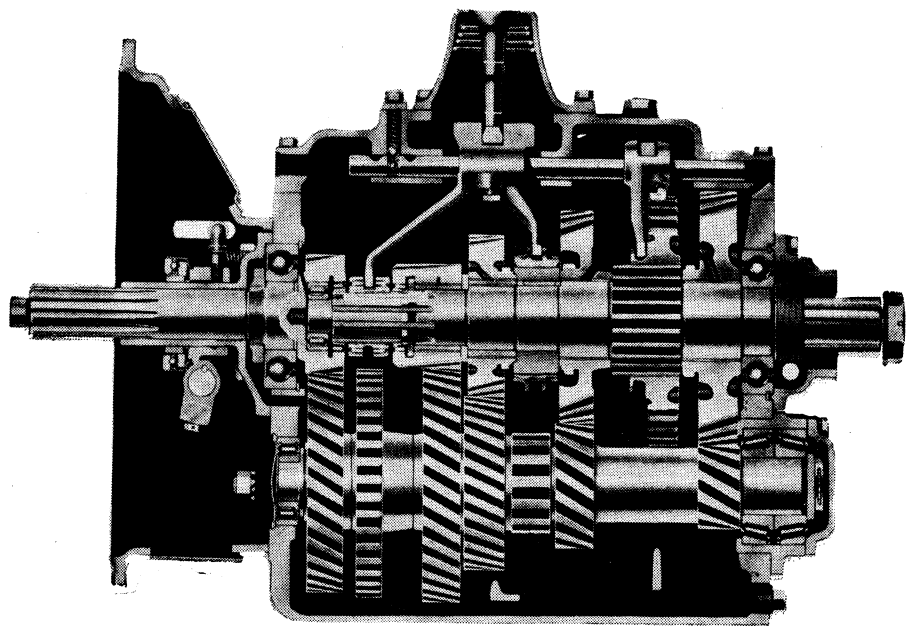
Fuller five speed transmission. Models 5-A-62, 620, 5-A-65, 650
